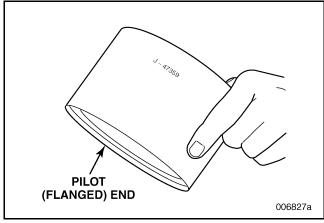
Piston Assembled in Seal Sizer/Piston Installer (Tool No. J 47359)
